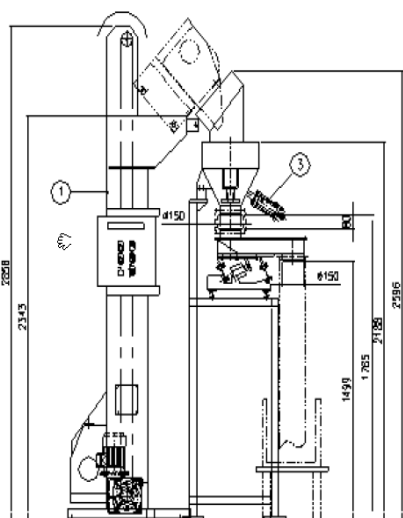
Manufacture drawing of a apparatus for U deposit transport
